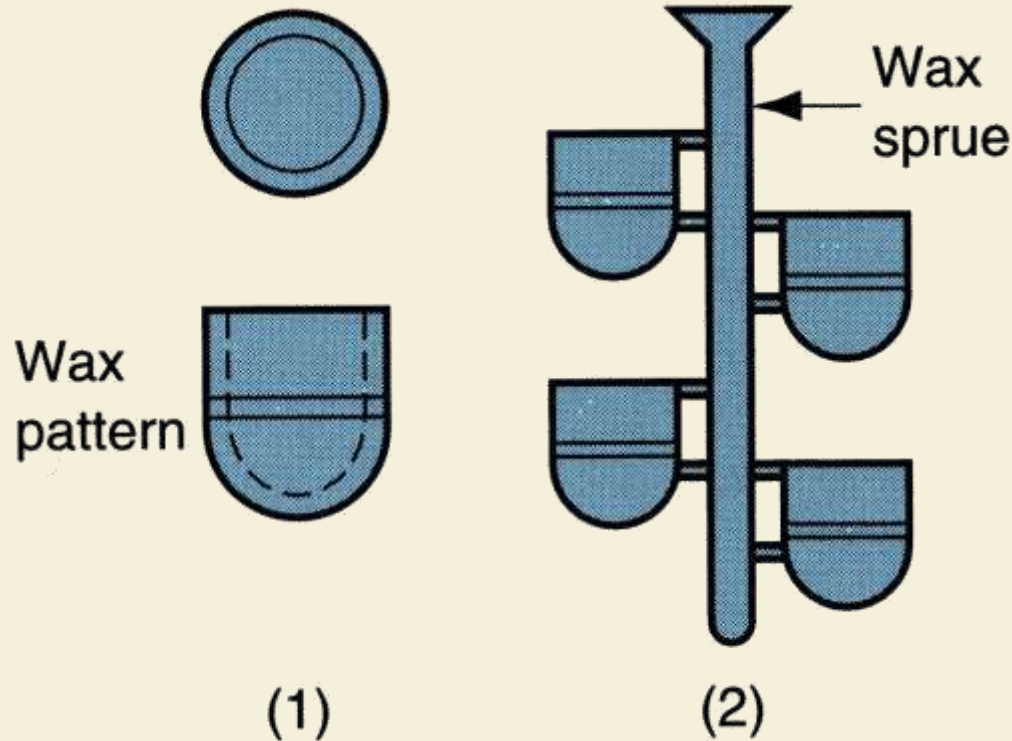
Steps in investment casting: (1) wax patterns are produced, (2) several patterns are attached to a sprue to form a pattern tree
